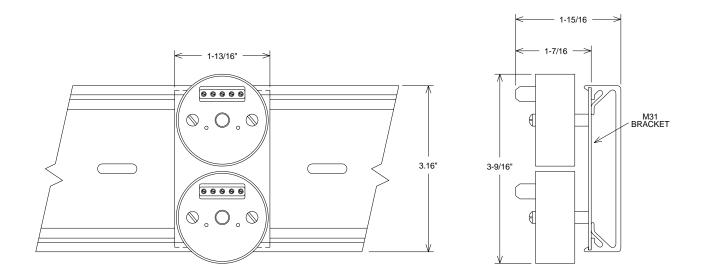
Assembly of the 18-811 Transmitter into the SnapTrack Mounting Rail
